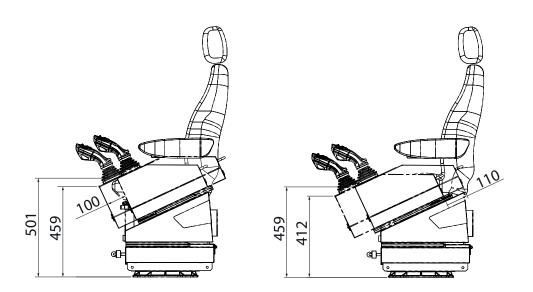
Control stand SV1C Premium-Line: Dimension drawing 4 (dimensions in mm)
